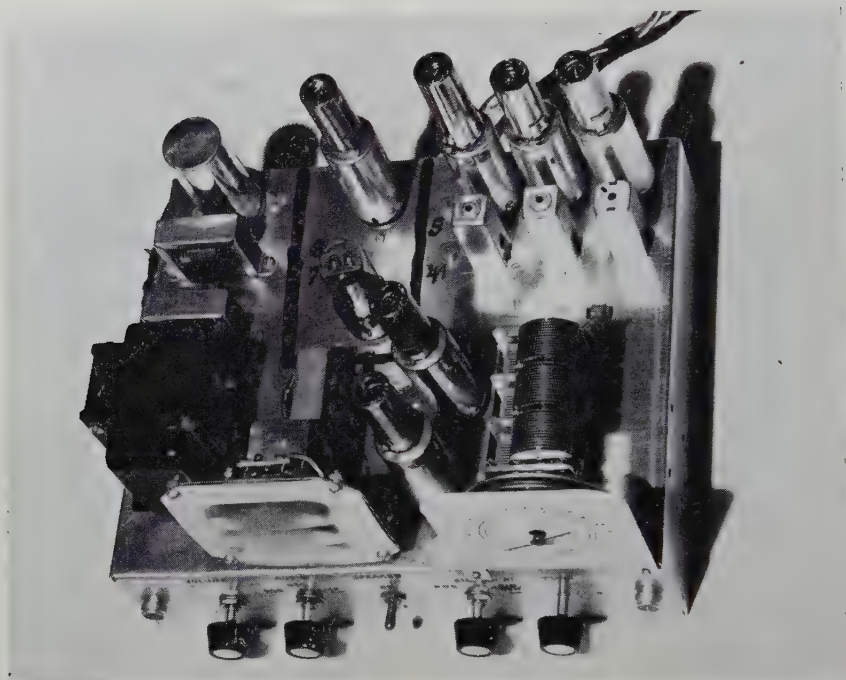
(a). Top view of receiver packaged using the circuit grouping method.
